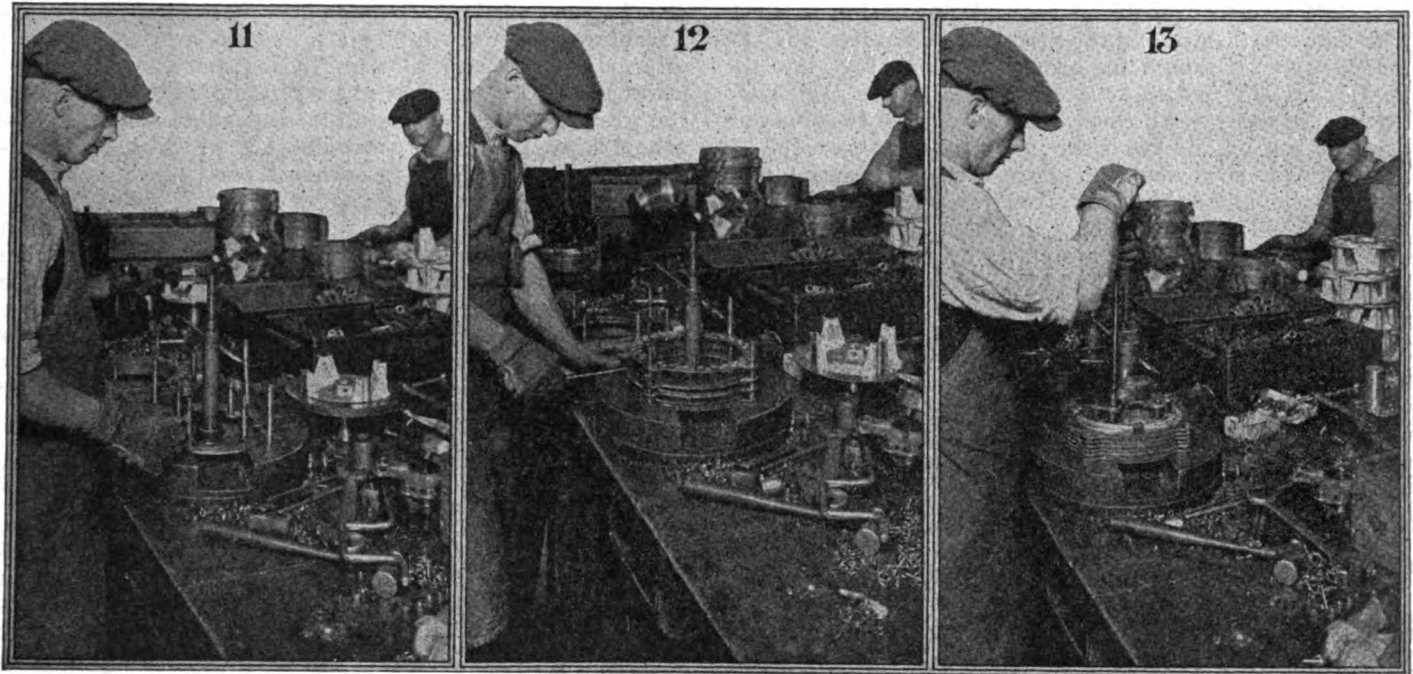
Starting clutch assembly on four pins mounted in assembling fixture. Fig. 12—Clutch about one-half assembled, showing the pressure plate, some of the disks and the separator and silencing springs between them. Fig. 13—Final operation in the clutch assembly, putting the nuts on the ends of the pressure plate studs. These nuts are locked by means of cotter pins
